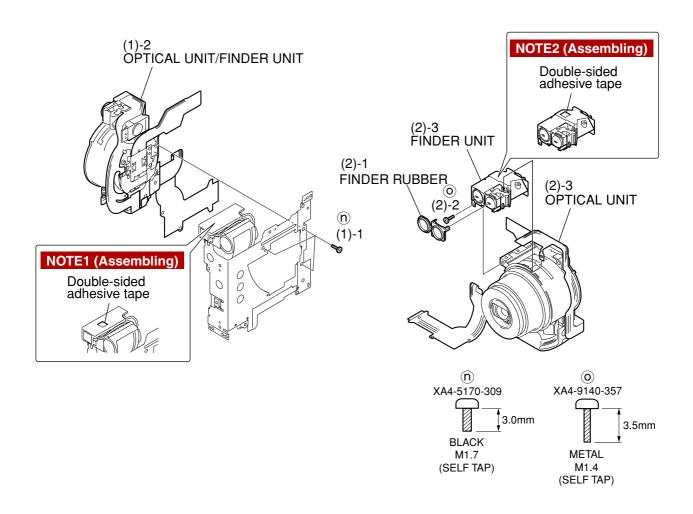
OPTICAL UNIT, FINDER UNIT
